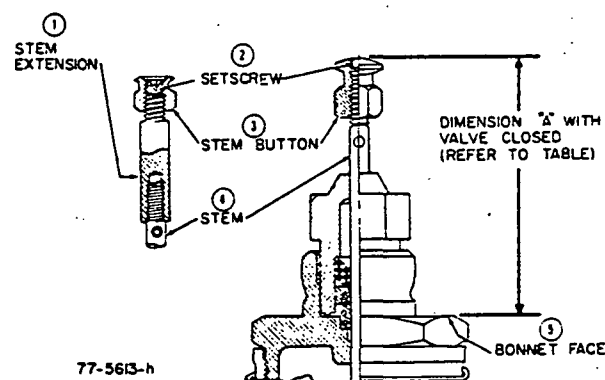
Method of Determining Proper Stem Button Adjustment With or Without Stem Extension. Refer to Table 2.
